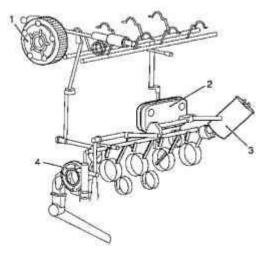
Contour grease gasoline engine Z 18 XER DOHC-I: 1 - regulators of camshaft, 2 - oil cooler, 3 - Oil filter, 4 - oil pump
